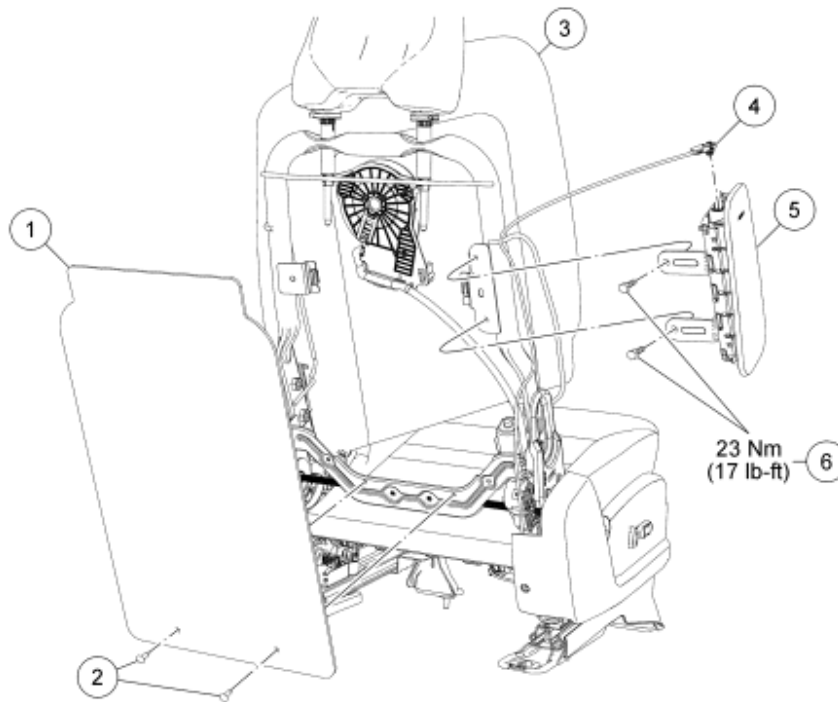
Identifying Side Air Bag Module With Torque Specifications
